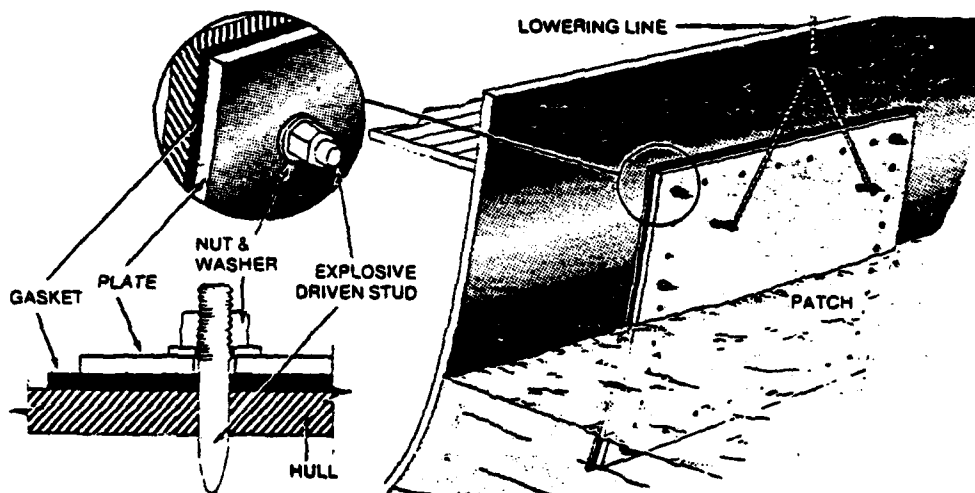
PATCHING WITH EXPLOSIVE DRIVEN STUDS
